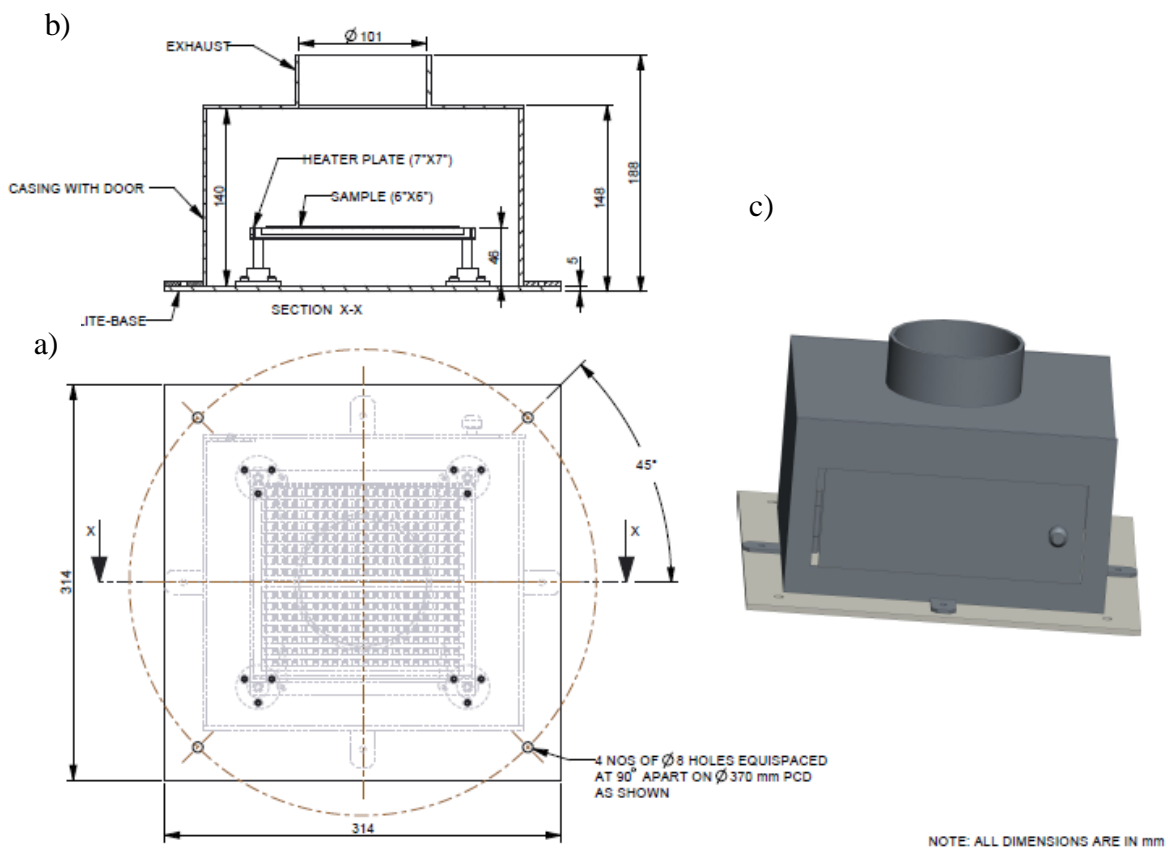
Technical drawing of the hot plate heater with details of design by PTC CREO software (all dimensions are in mm). (a) 2D top view (b) 2D section (X-X) view (c) 3D view of the object.
